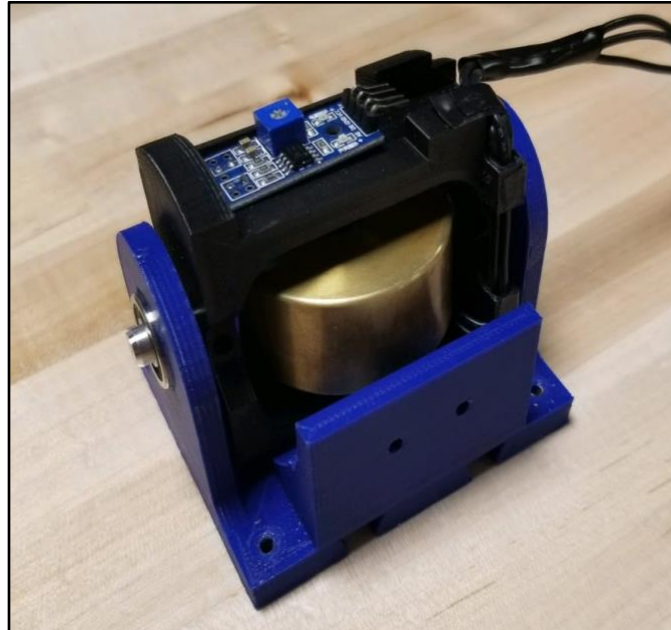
ASSEMBLY WITHOUT COVER AND HAND MOUNT
